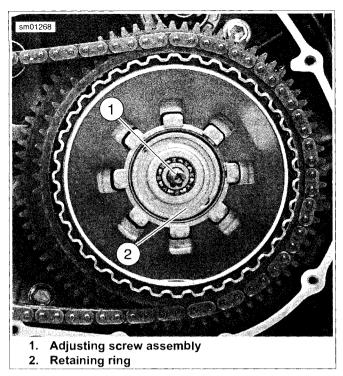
Clutch Adjusting Screw Assembly and Retaining Ring
